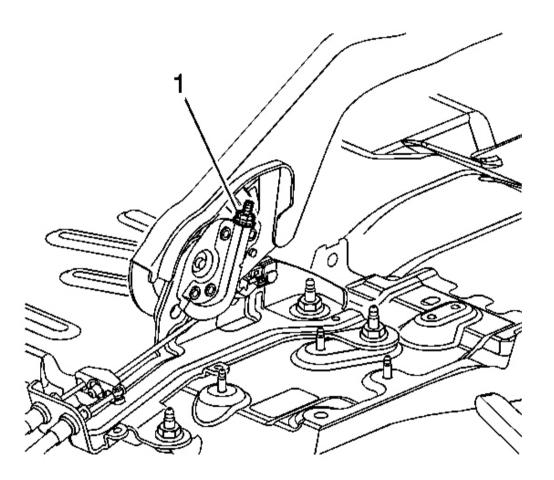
Loosening Adjusting Nut (1) Completely To The End Of Front Cable Threaded Rod Courtesy of GENERAL MOTORS CORP.
